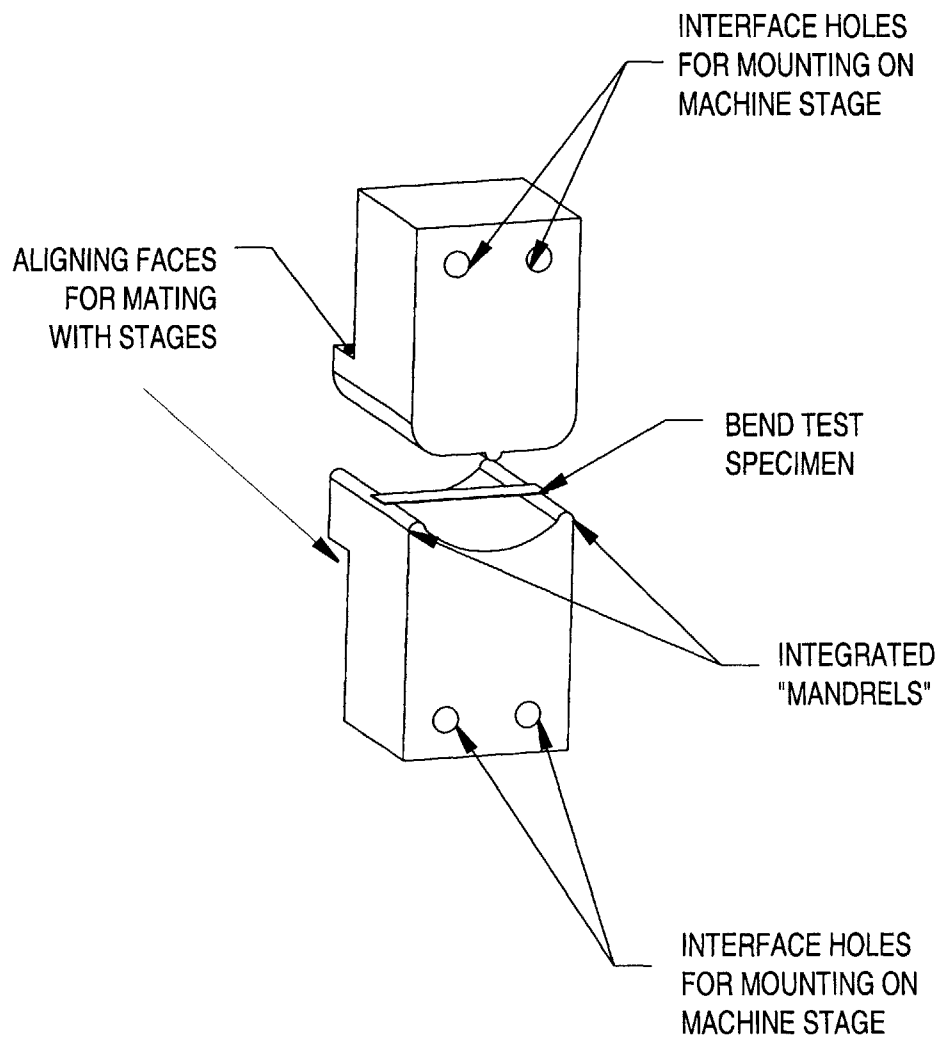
Three-point bend configuration. Bottom fixture is Part. GS0200-04. Top fixture is GS0200-05 for 3 point bend and GS0200-06 for 4 point bend testing.
